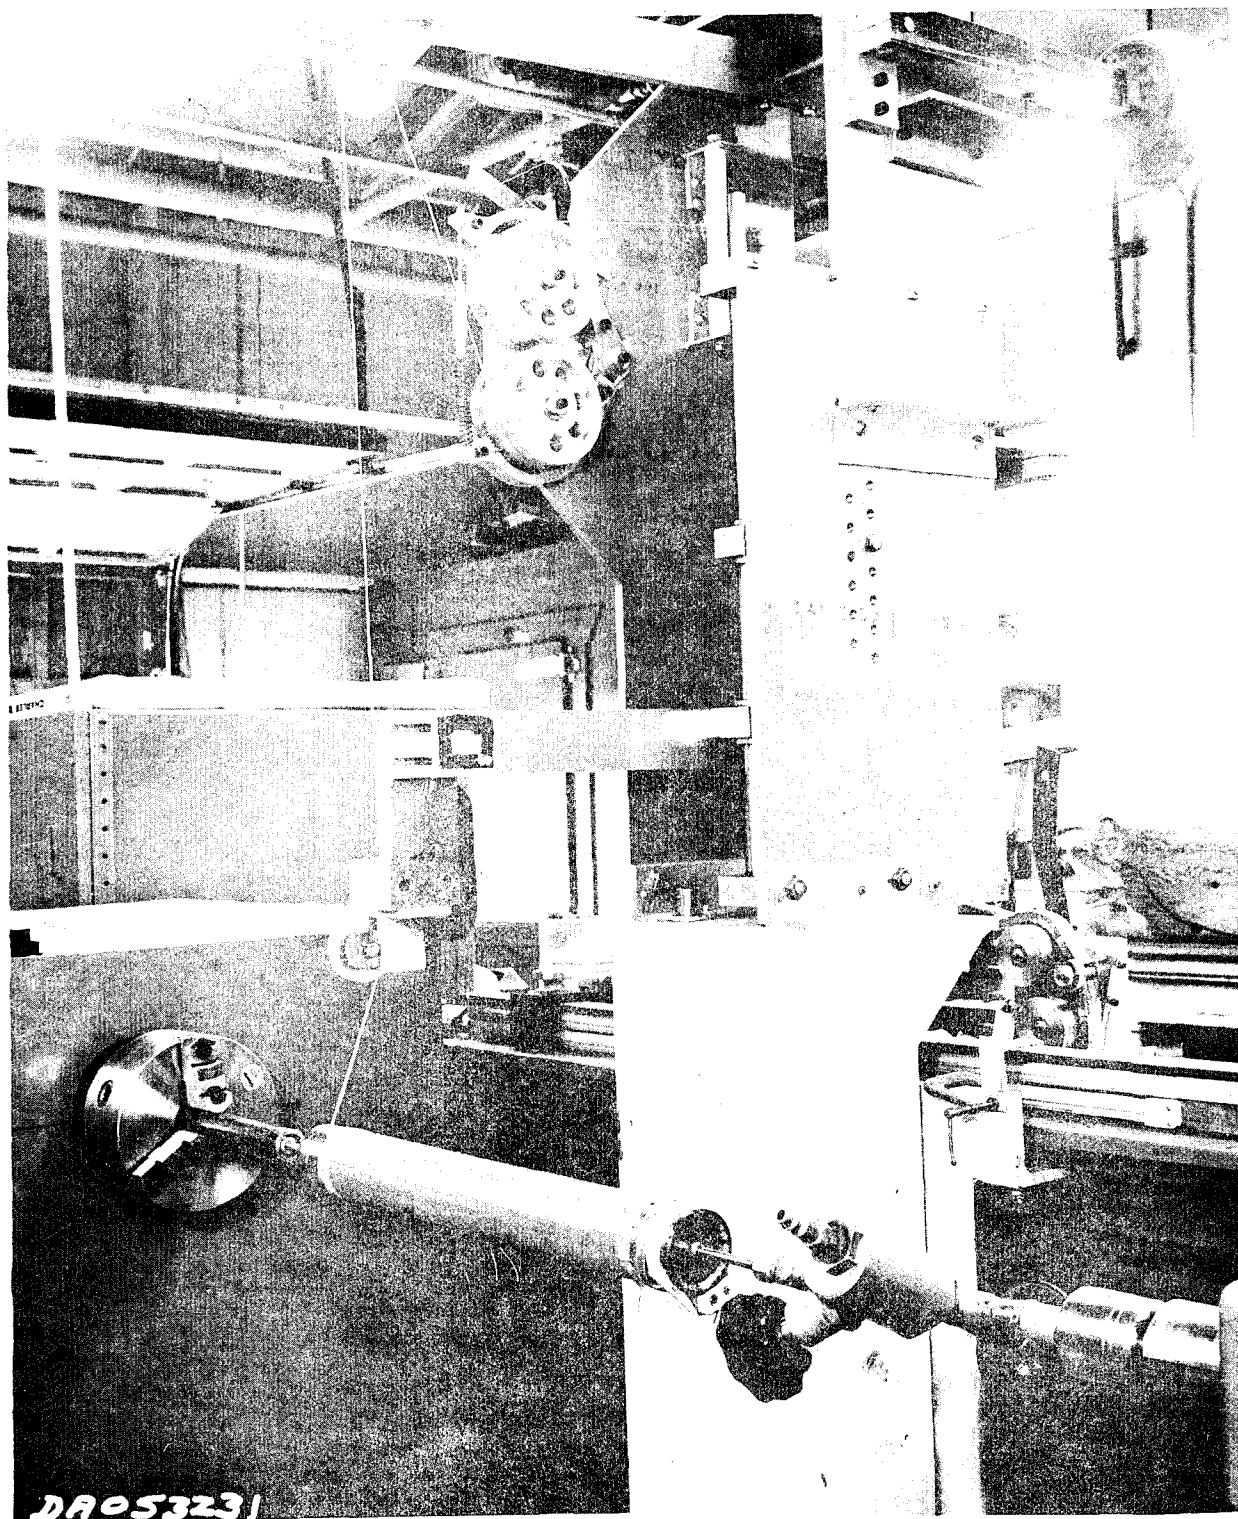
Filament-Winding Machine, 2 in. (5.08 cm)
